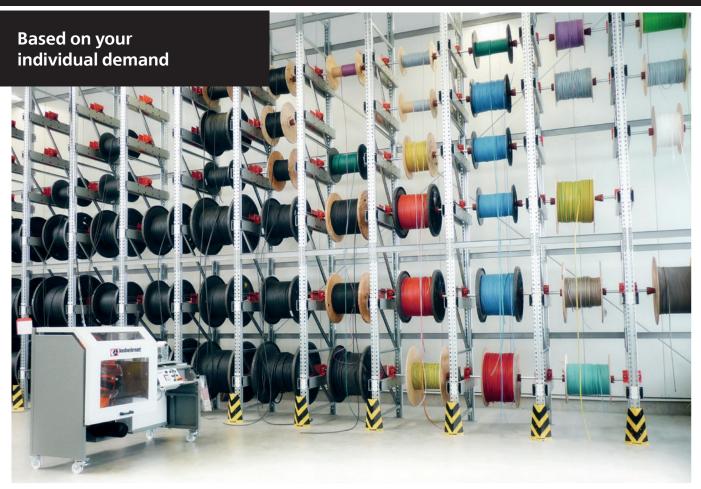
LAGROL cable drum rack with MOTROL 800 EASY coil and spool winding machine
